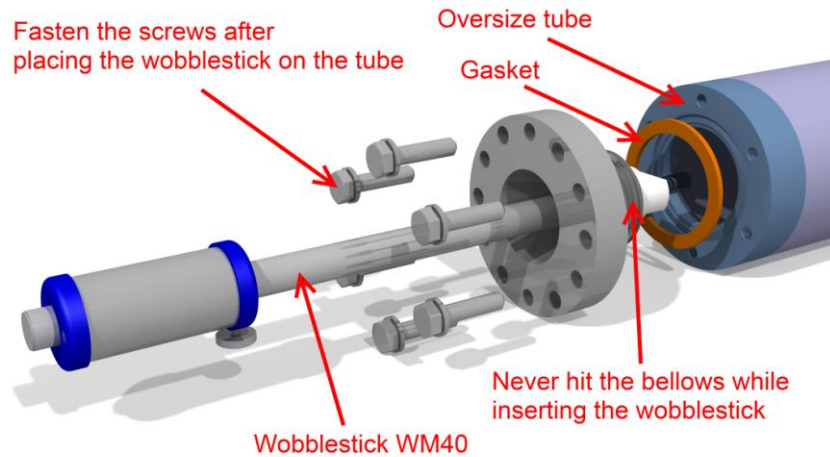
Mounting arrangement, screws used: M6x20 hex-headed or cylindrical
